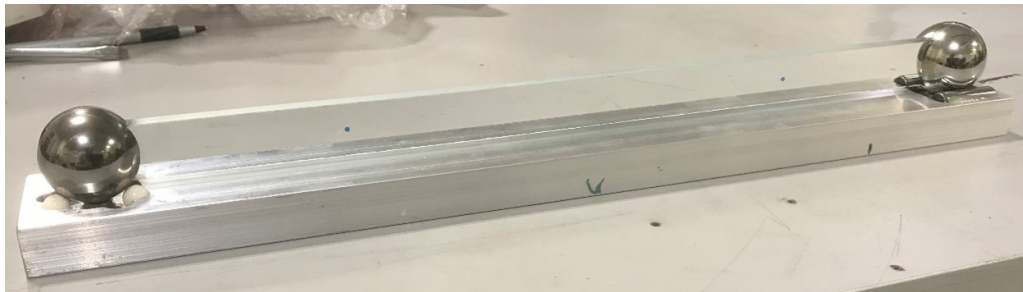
Straightedge mounted in kinematic mounted balls showing the fiducials used in alignment of the straightedge to the machine carriage and probe.
